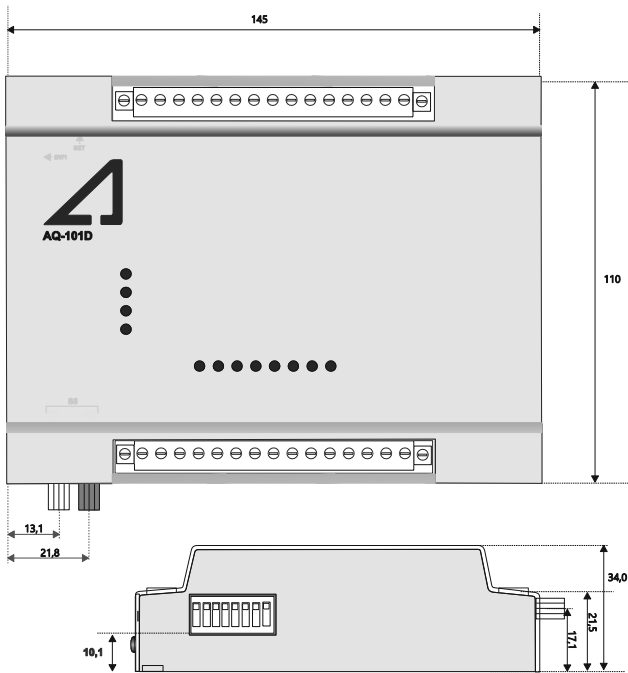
AQ101D device dimensions, all dimensions in millimeters.
